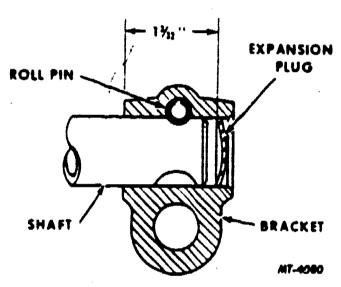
Installation of Rocker Arm Shaft to End Support Bracket.
